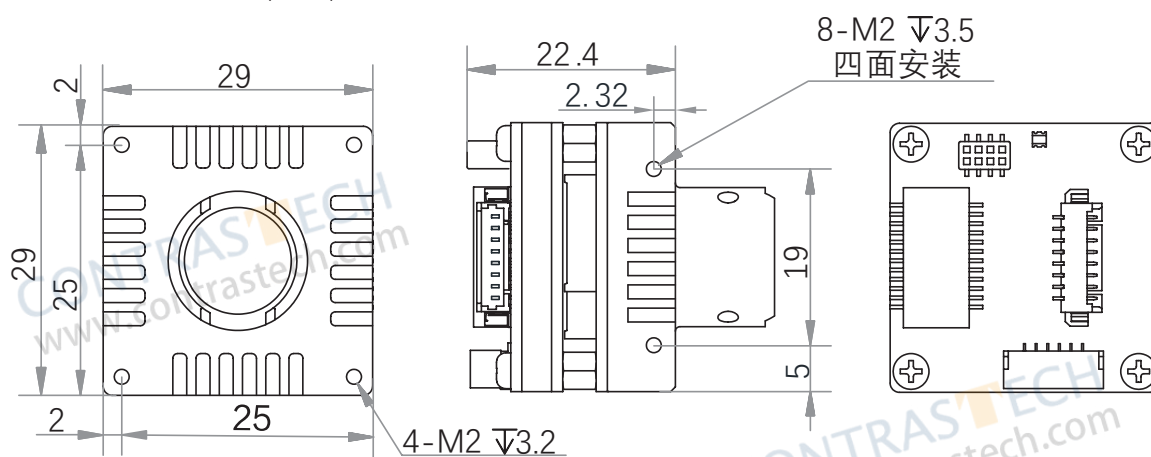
Mechanical Dimensions (in mm) of the M12-mount WTB interface Cameras with 29 * 29 * 22.4 mm.
